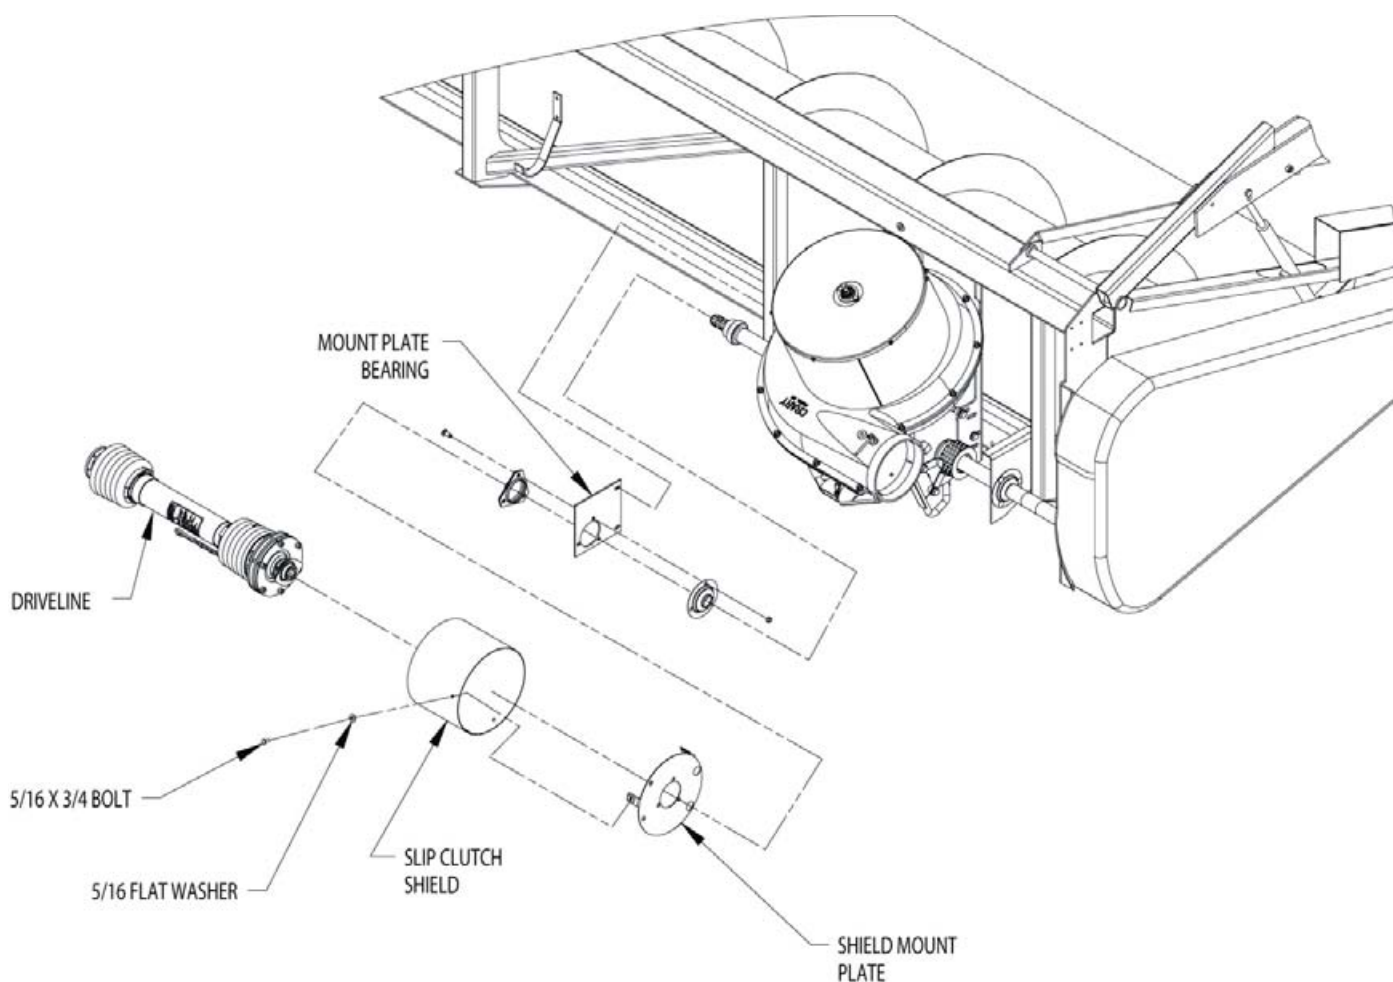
, Right hand drive kit for gearboxes without a stub shaft
